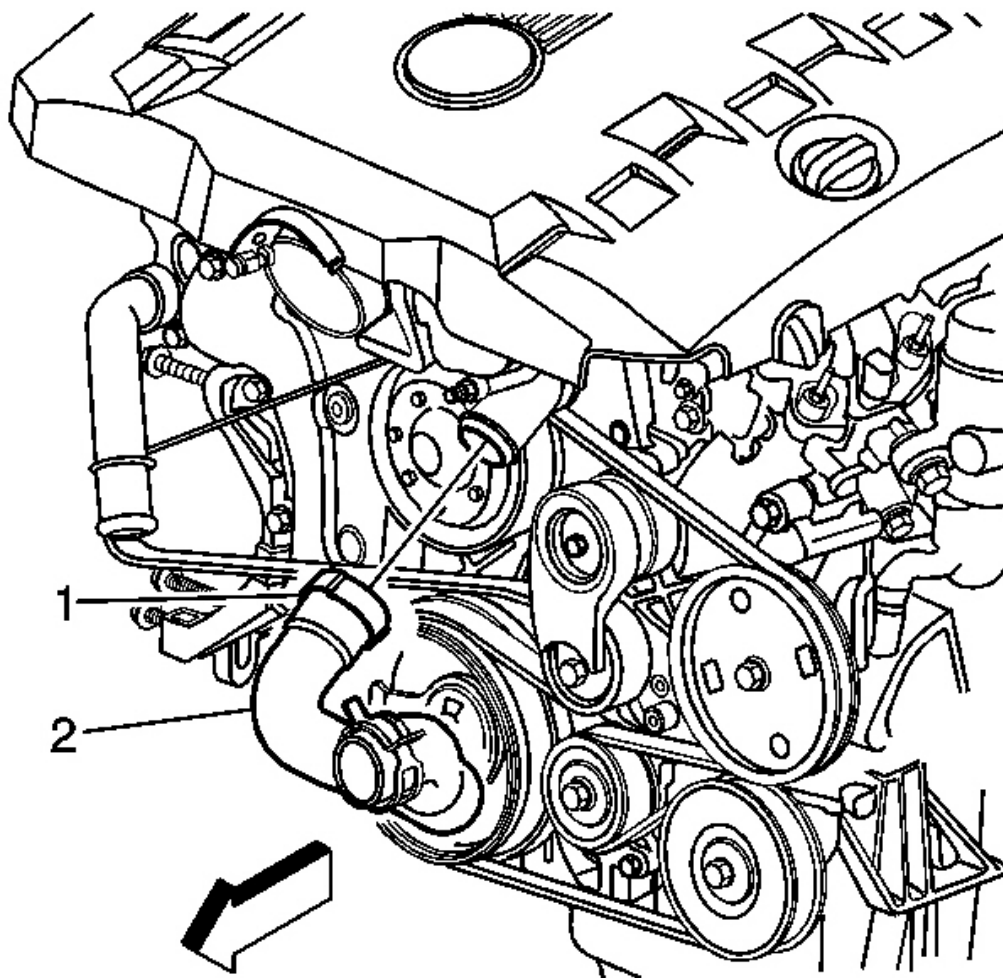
Radiator Inlet Hose & Clamp At Engine
